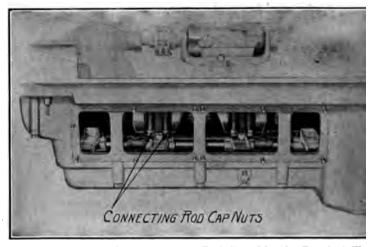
Showing how Connecting Rod Caps May be Reached The Inspection Holes in the Side of the Crankcase.
